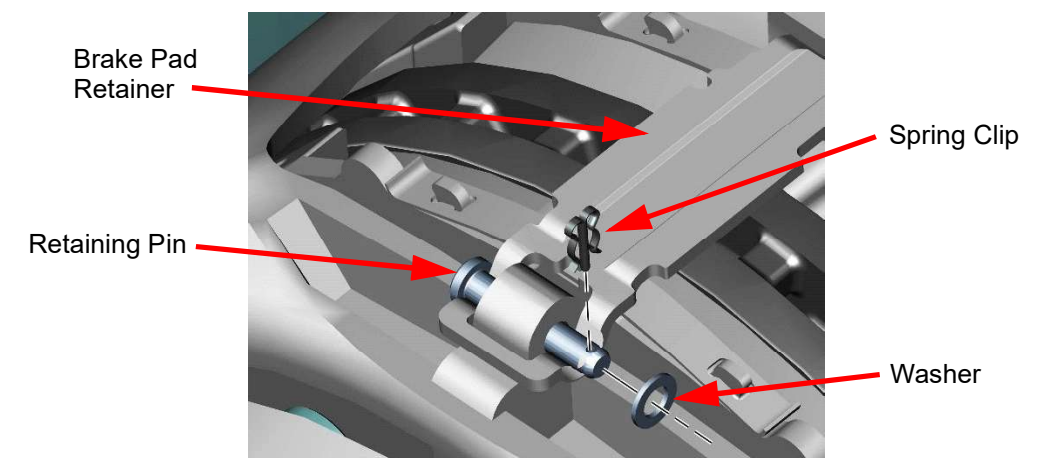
Removing the Spring Clip, Washer, and Retaining Pin
